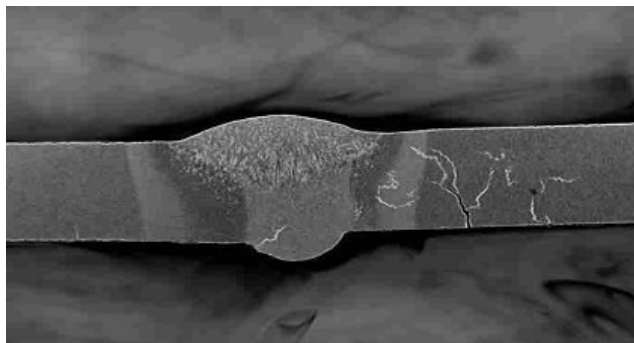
The macro-etching technique shows the different areas in the heat-affected zone and the cracks.
